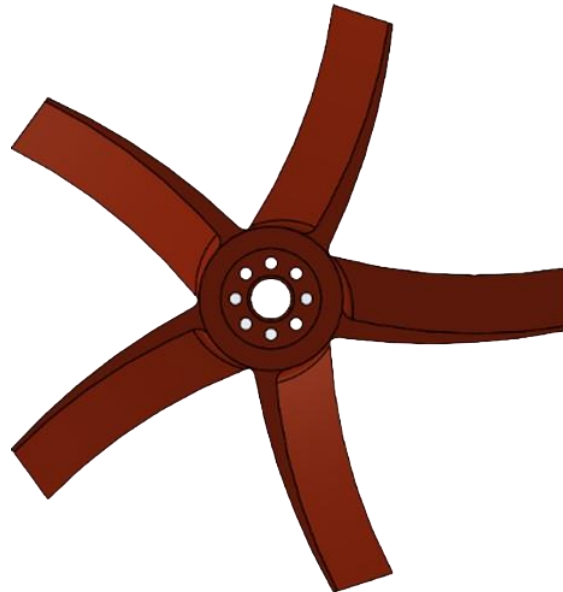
3D-printed rotor with a $\frac{1}{2}$ " center hole for the ball bearings and shaft, as well as tapped holes for the screws of the connection hubs.
